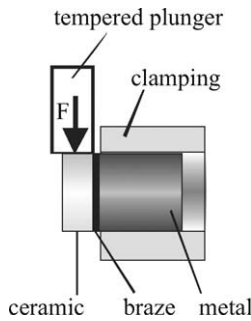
Shear testing configuration of the brazed ceramic–steel joints.
